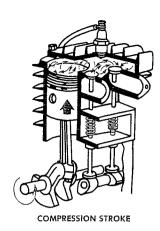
The piston moves up, squeezing the ture for the compression stroke. (Briggs & Str Corp.)
